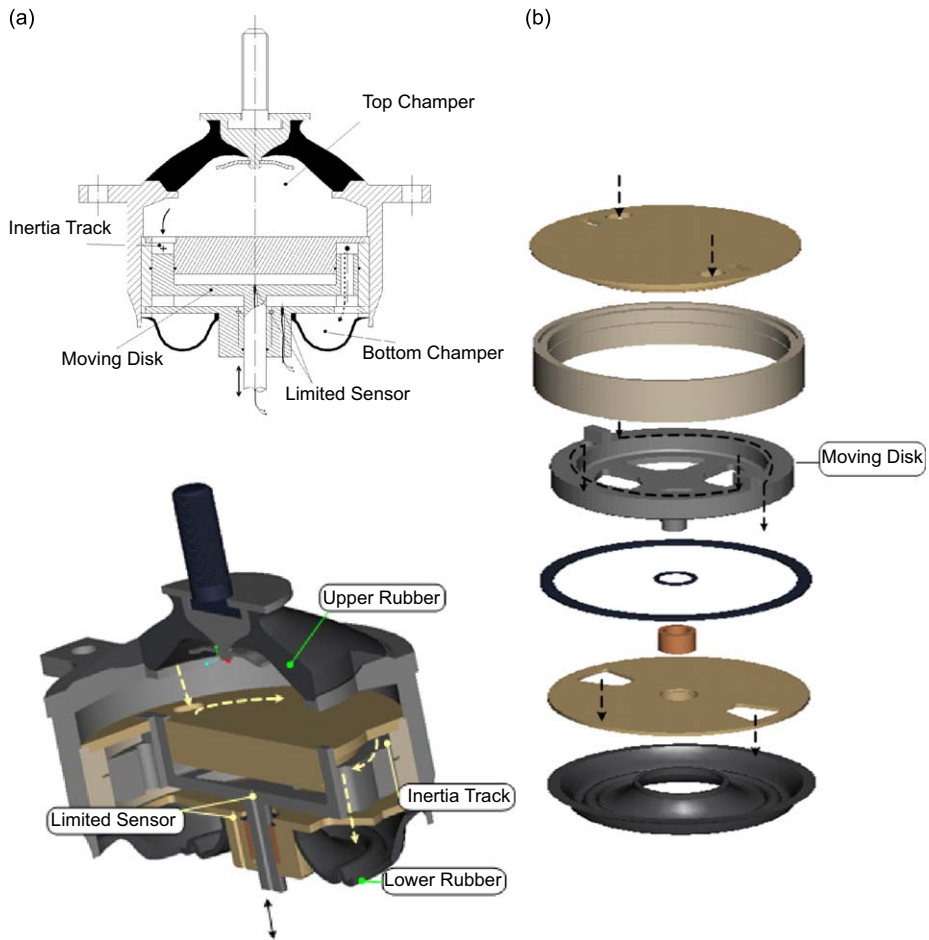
Hydraulic mount with the variable inertia track: (a) cross section of a hydraulic mount and (b) assembly components.
